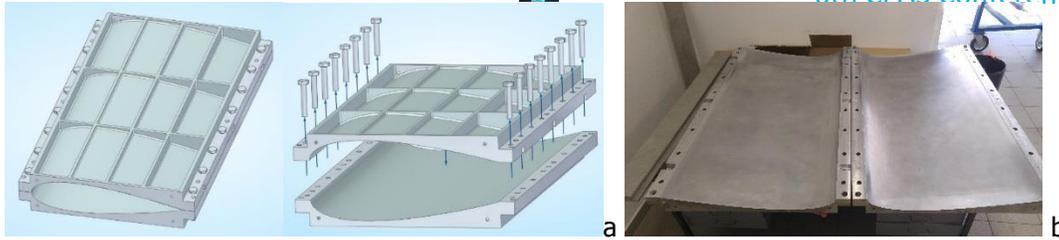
(a) CAD model of the mould (b) manufactured two piece aluminium mould
